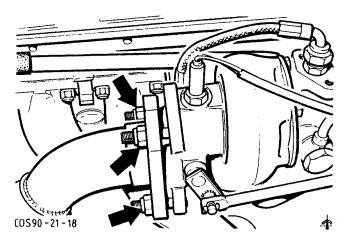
Nuts securing front exhaust pipe to turbocharger.
